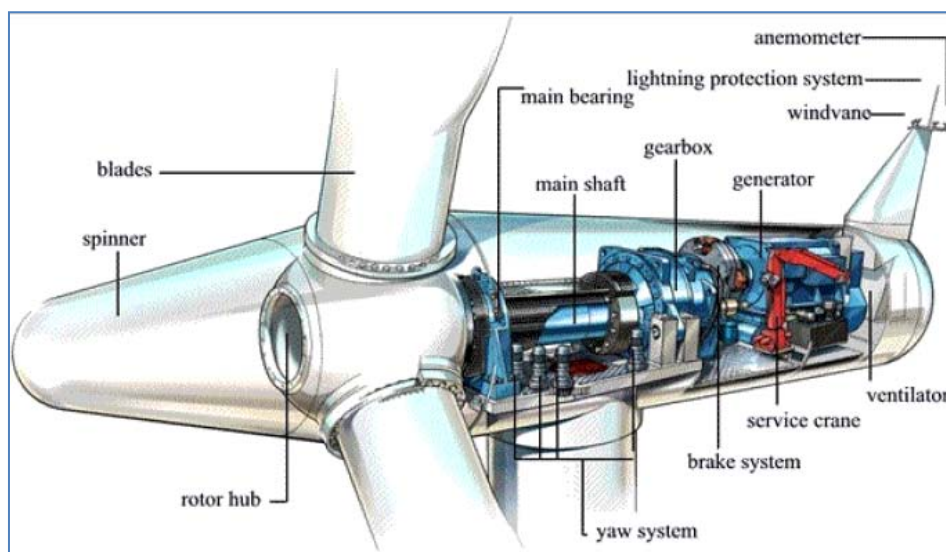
The parts of a Siemens 2.3 MW turbine machinery
